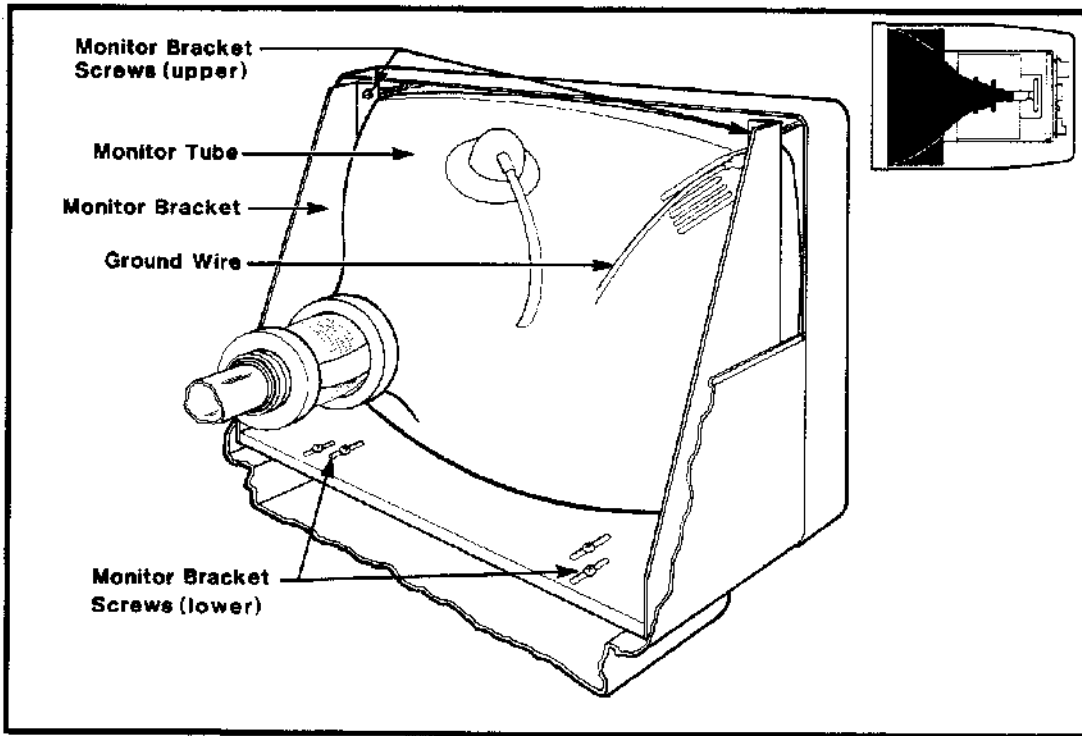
REMOVING THE C-5 VIDEO TUBE ASSEMBLY
